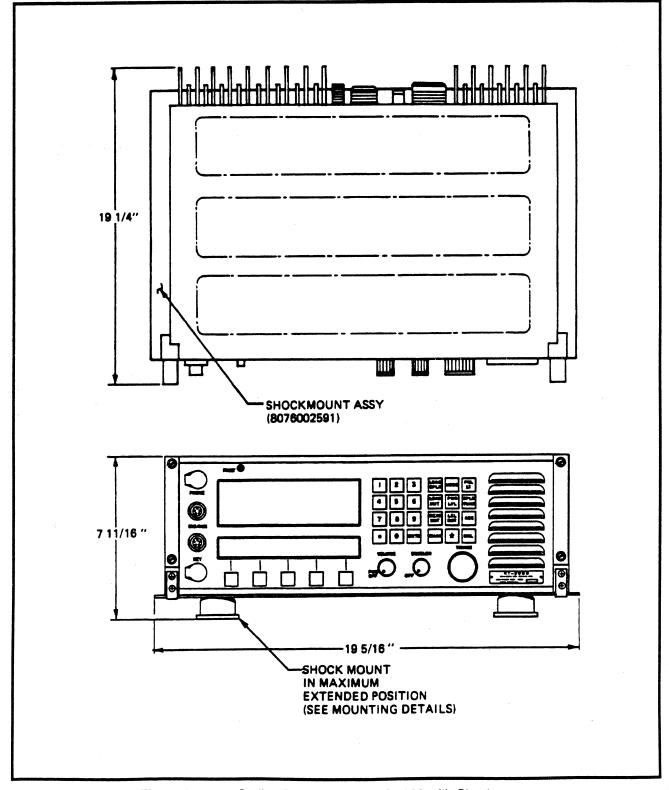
Outline Dimensions of RT-9000 with Shockmount.
